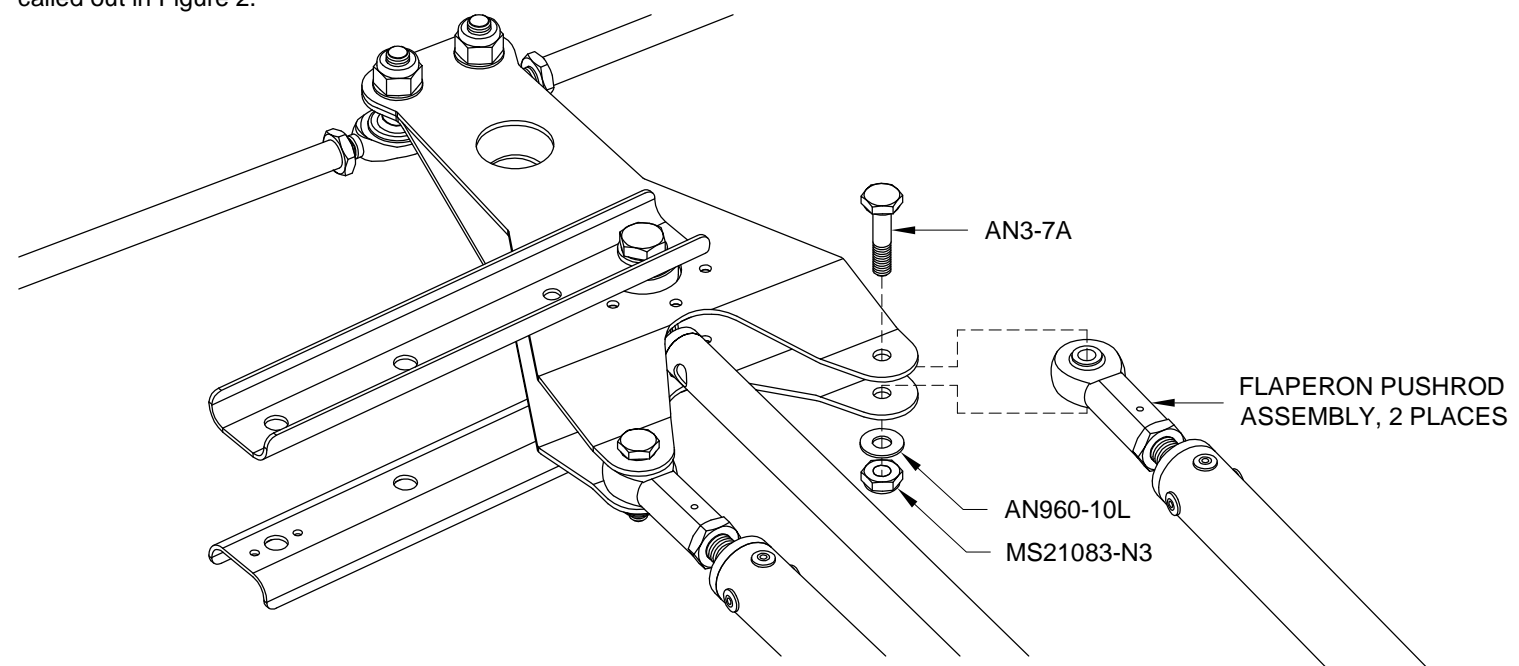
ATTACHING THE FLAPERON PUSHROD ASSEMBLIES
